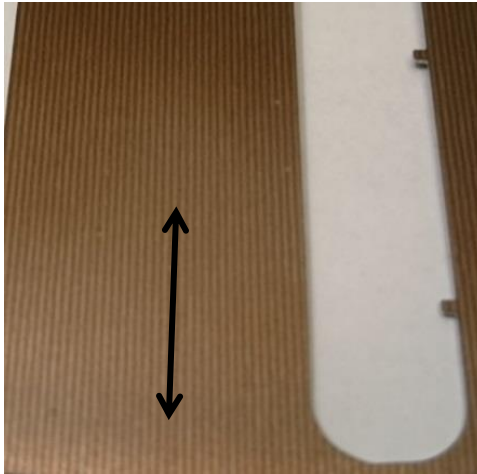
Laminated surface of rotor electric steel sheet where the lamination stripes presents the steel sheet rolling direction.
